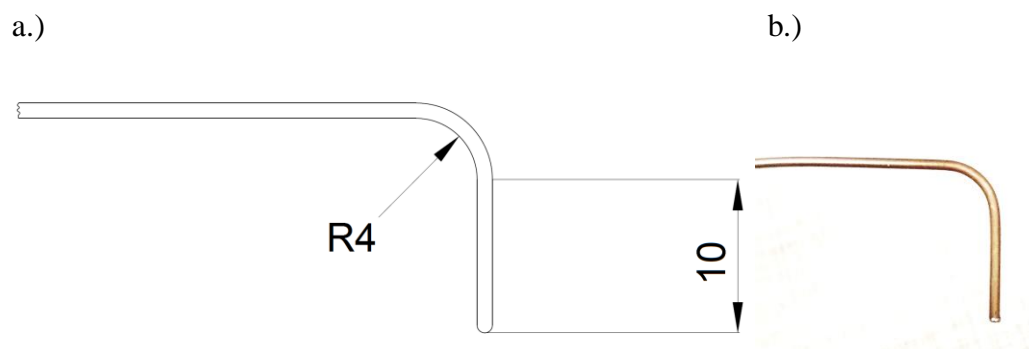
View of bended thermocouple sensor: a) geometry of the sensor; b) picture of the bended sensor
